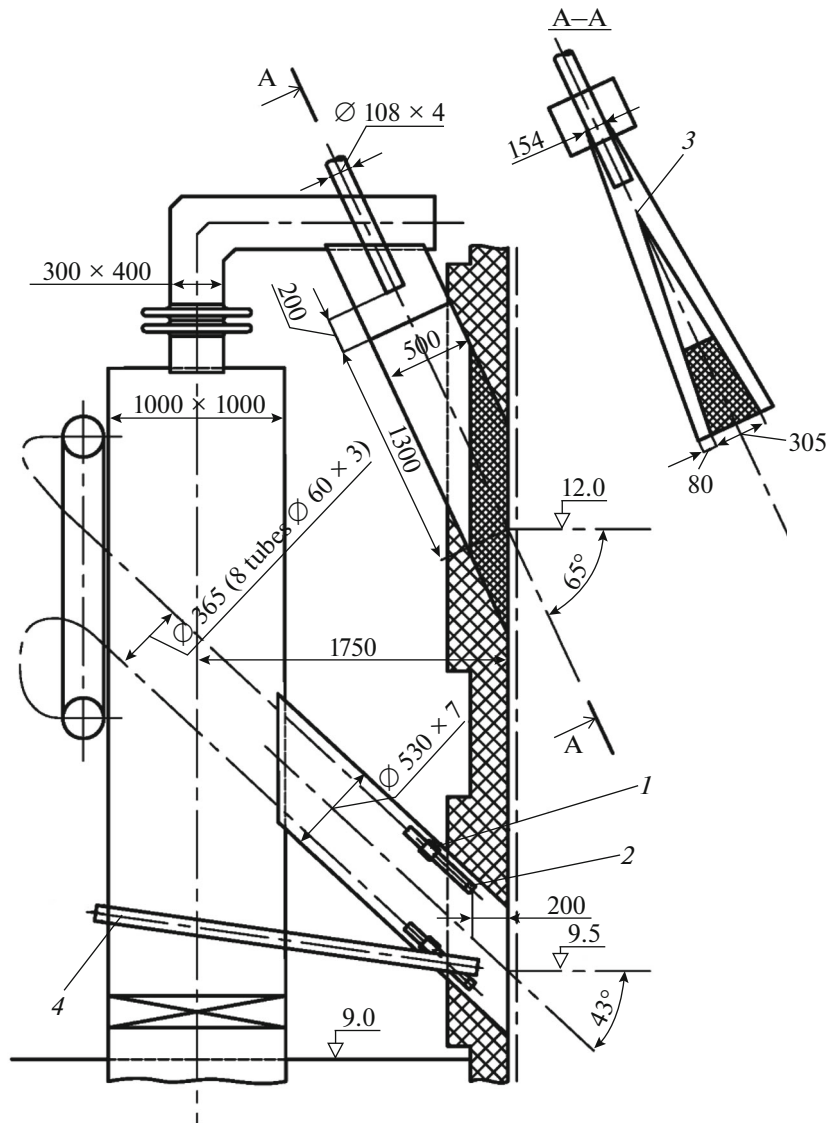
Conceptual design of the pulverized coal burner and the secondary air nozzle (of the oil-gas burner): (1) sliding support; (2) gas orifice; (3) vertical impeller; (4) tube for mounting the oil-fired burner.
